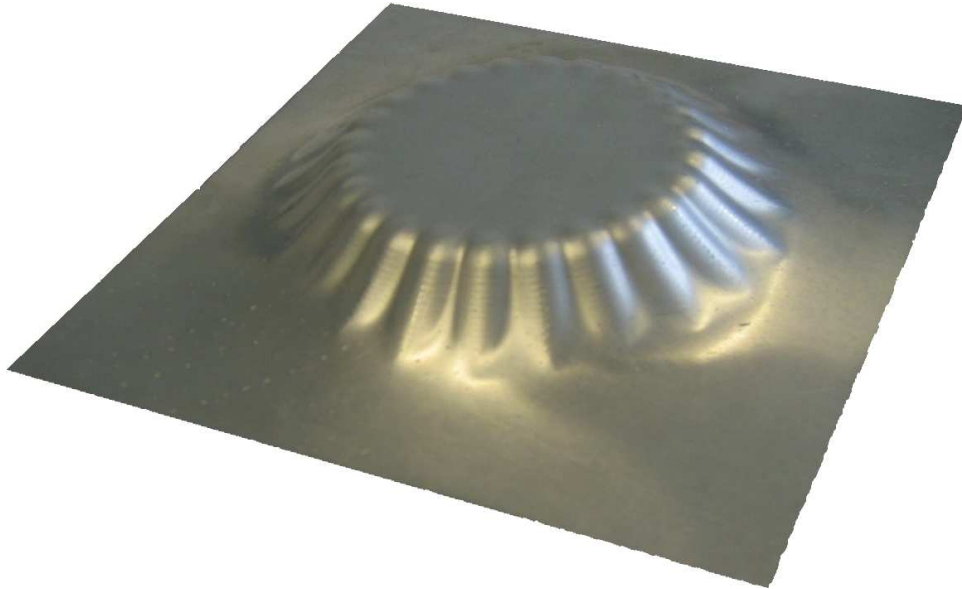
Product formed by using a ‘discrete’ tool-path on the Cambridge ISF machine.
